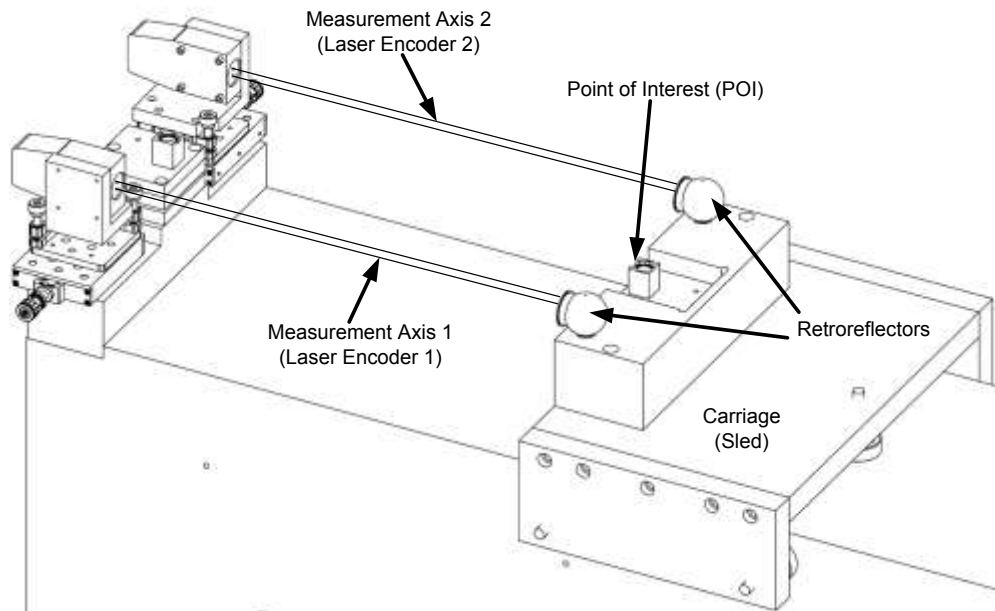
Detail of component layout for 1 Dimensional Measuring Machine [6]
